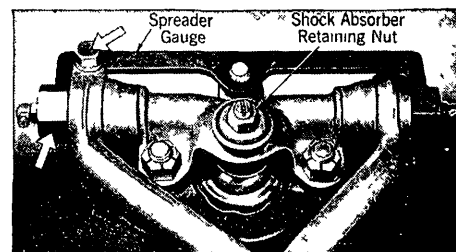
Locating upper control arm bushing (drop forged type arm), 1940-42
